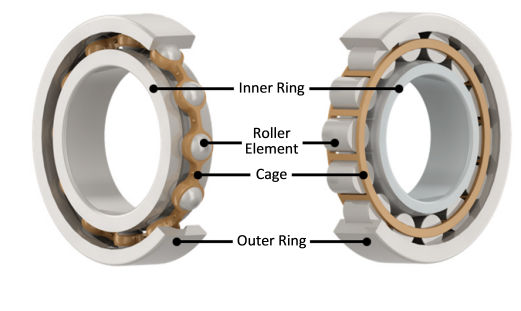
Structure of an exemplary rolling bearing of a deep groove ball bearing (left) and a cylindrical roller bearing (right).[Wan15]
